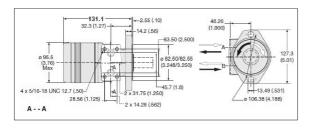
Dimensions of hydraulic motor for conveyor belt.
